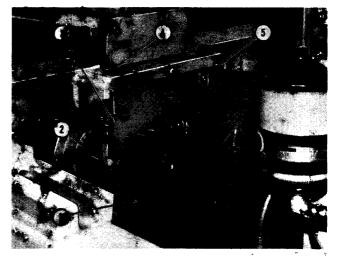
TRANSMISSION MOUNTING BRACKET
